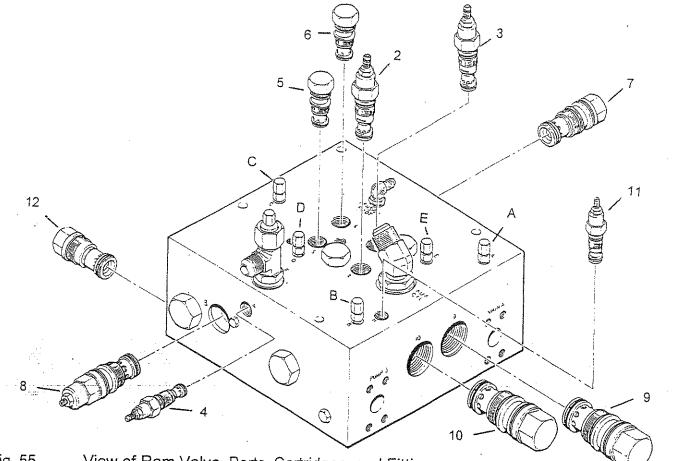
View of Ram Valve, Ports, Cartridges, and Fittings
